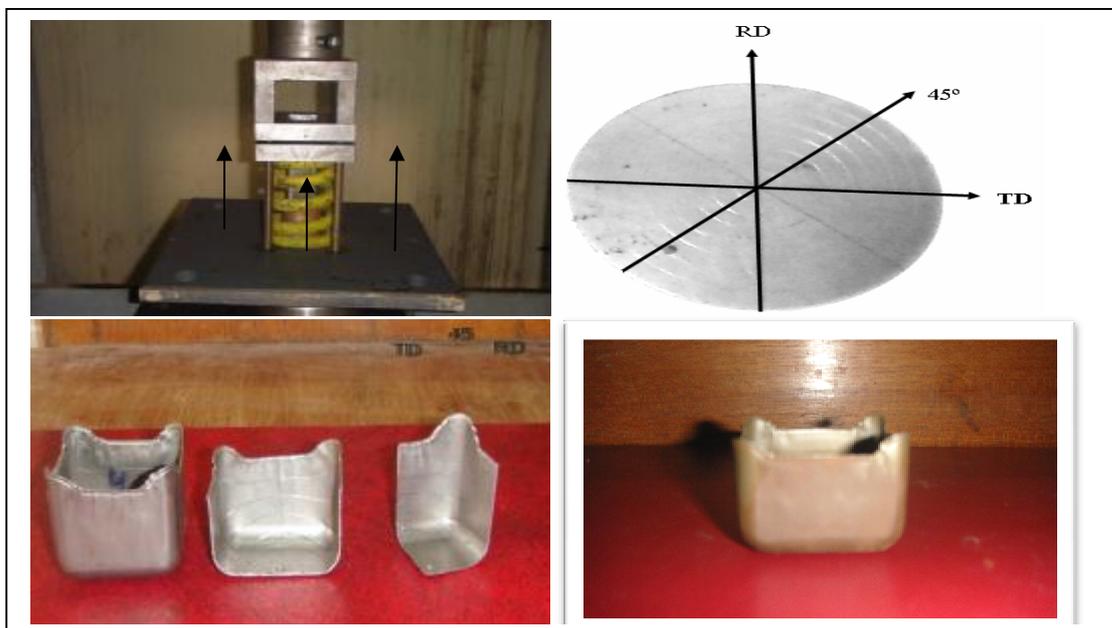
drawing die used in the experimental work, grid circles printed on undeformed blank, sample of divided cup and completely drawn parts.
